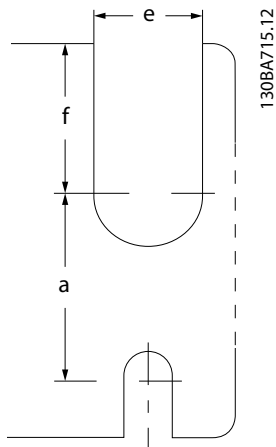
Top and Bottom Mounting Holes (B4, C3, and C4)
